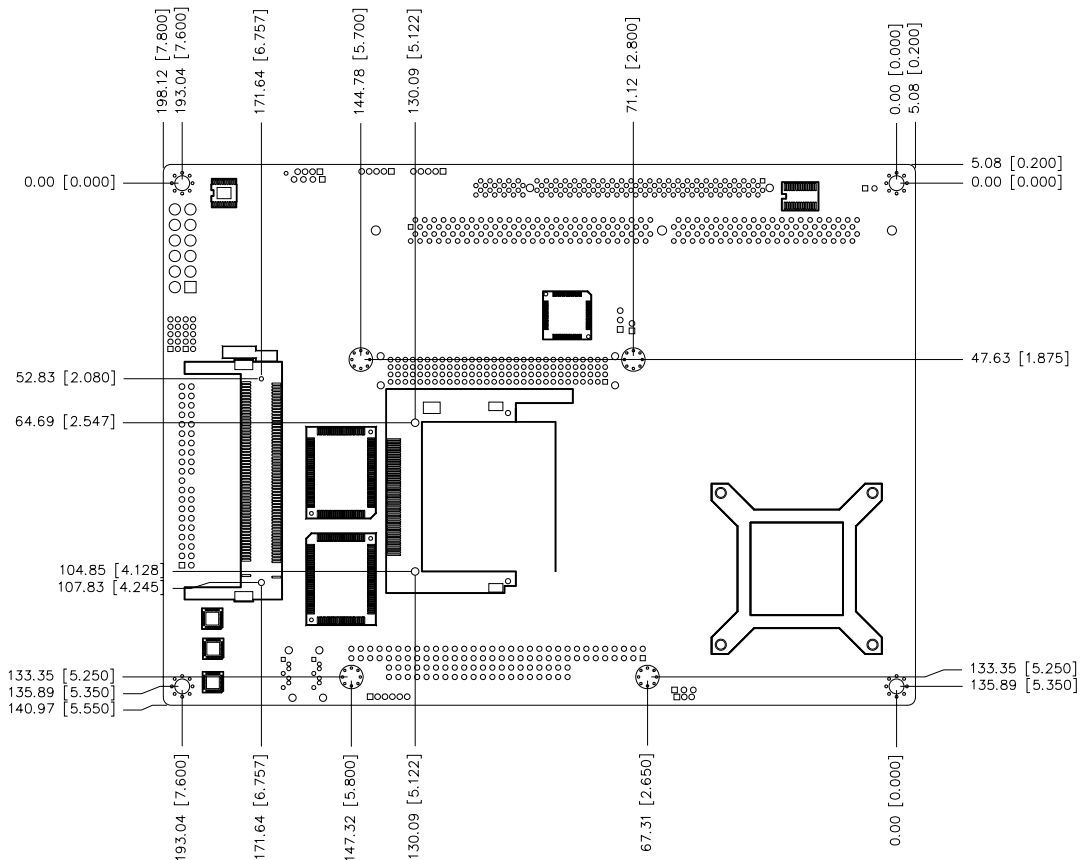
PCM-9587 A2 Mechanical Drawing (solder side)
